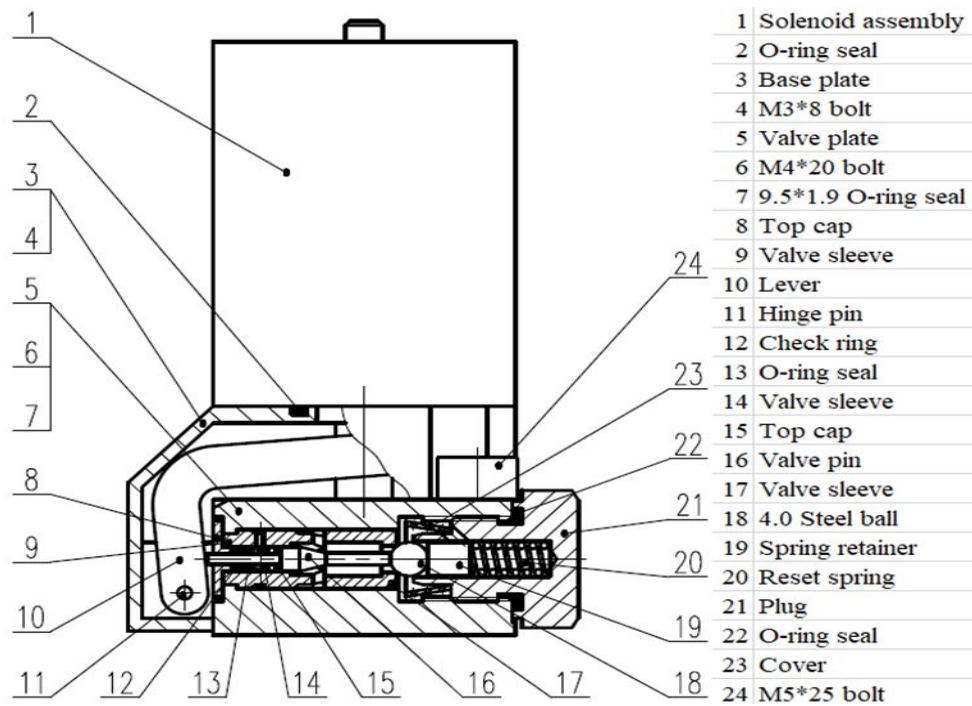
Schematic of pilot valve-solenoid assembly.
